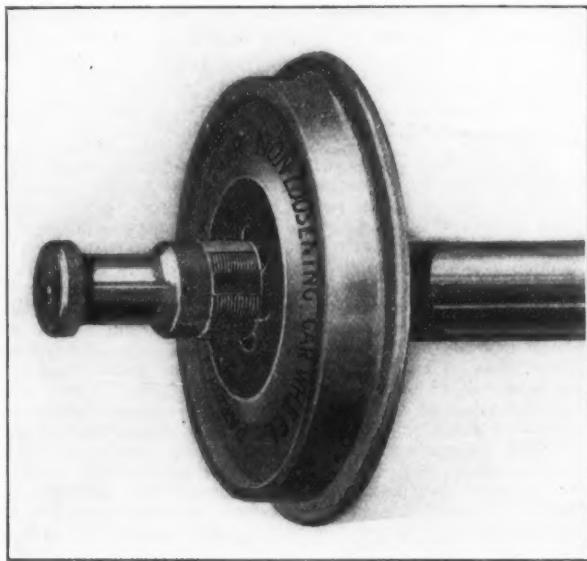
The Latcher Wheel, Showing the Fluted Bore and Flowed Axle.
